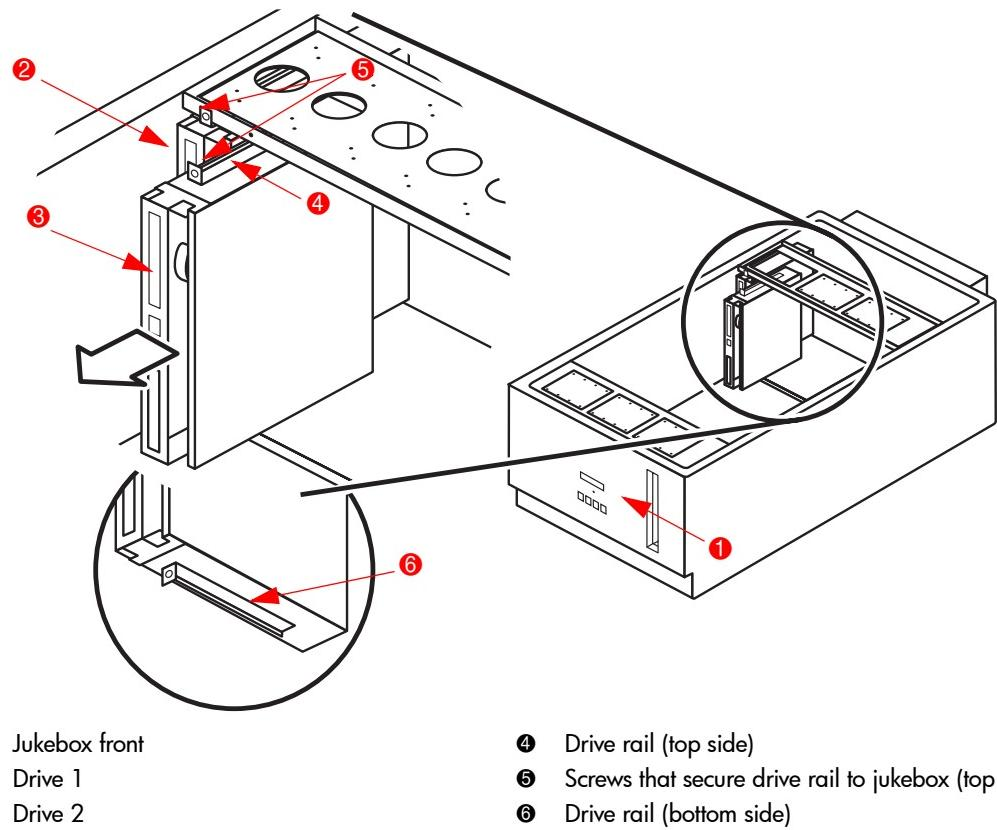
Remove screws that secure drive rails to jukebox (the right side of the drive is shown)
